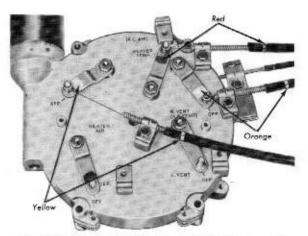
Control Cables Installed-Ranger and Pacer-1958-(E-2642)
